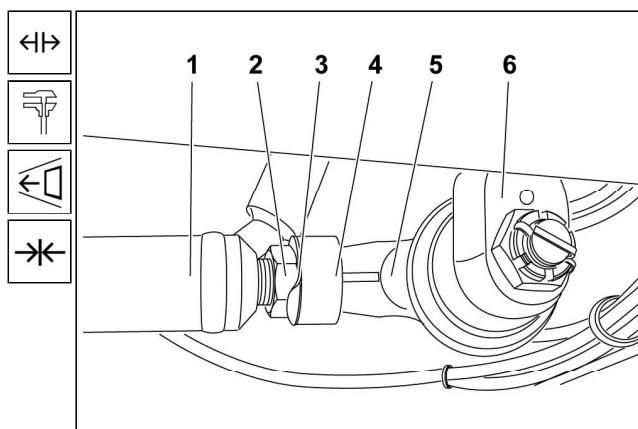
Adjustment of the length of power cylinder pull rod c/w joint
